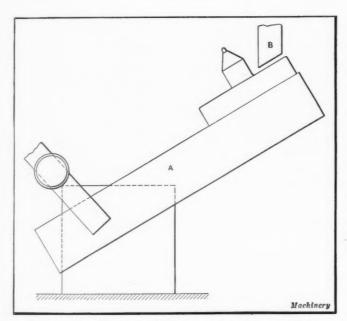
Using Master Angle-block to get True Angle on Grinding Wheel
